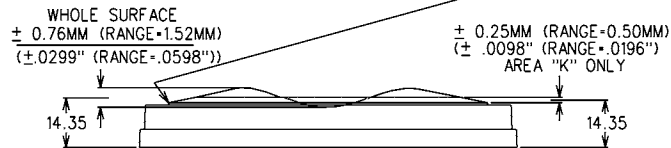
Mechanical drawings defining the flange dimensions of a microplate
